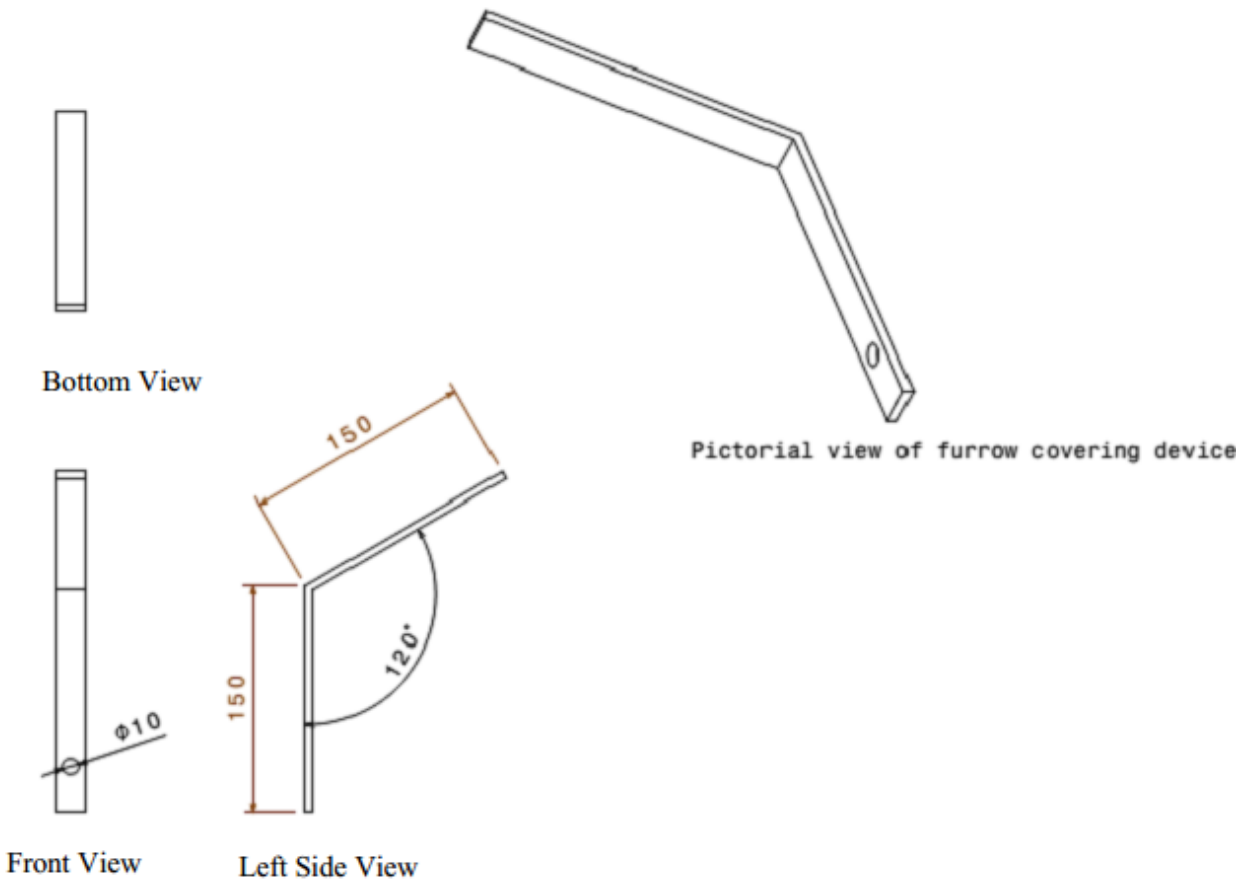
Furrow covering of the prototype planter (dimensions are in mm)
